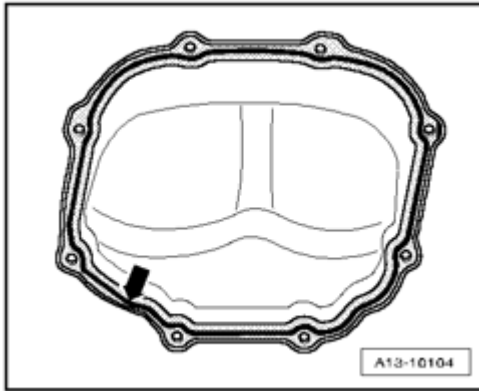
Applying Sealant Bead On Clean Sealing Surfaces Of Left/Right Cover For Timing Chain
